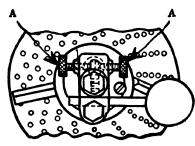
INDEXING CRANK ADJUSTING SCREWS
